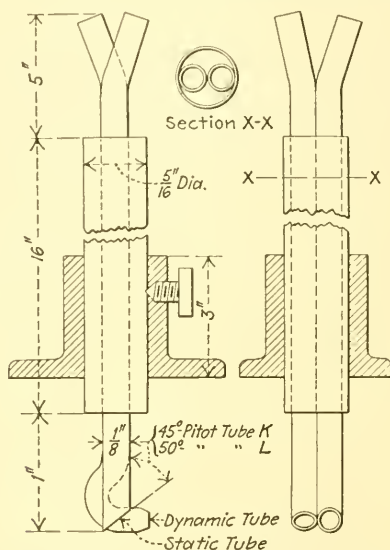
DIMENSIONED SKETCH OF PITOT TUBES K AND L
